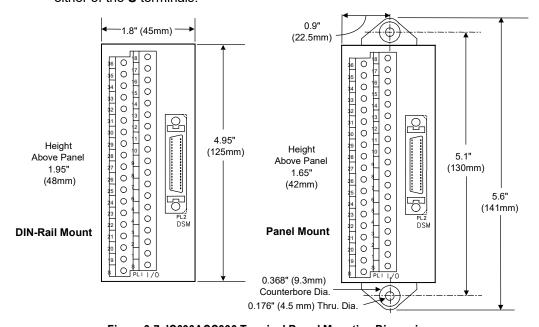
IC693ACC336 Terminal Board Mounting Dimensions
